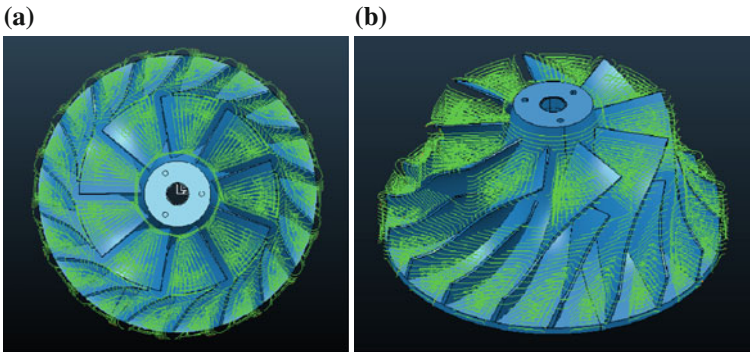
3-axis roughing process. a Top view. b Isometric view
